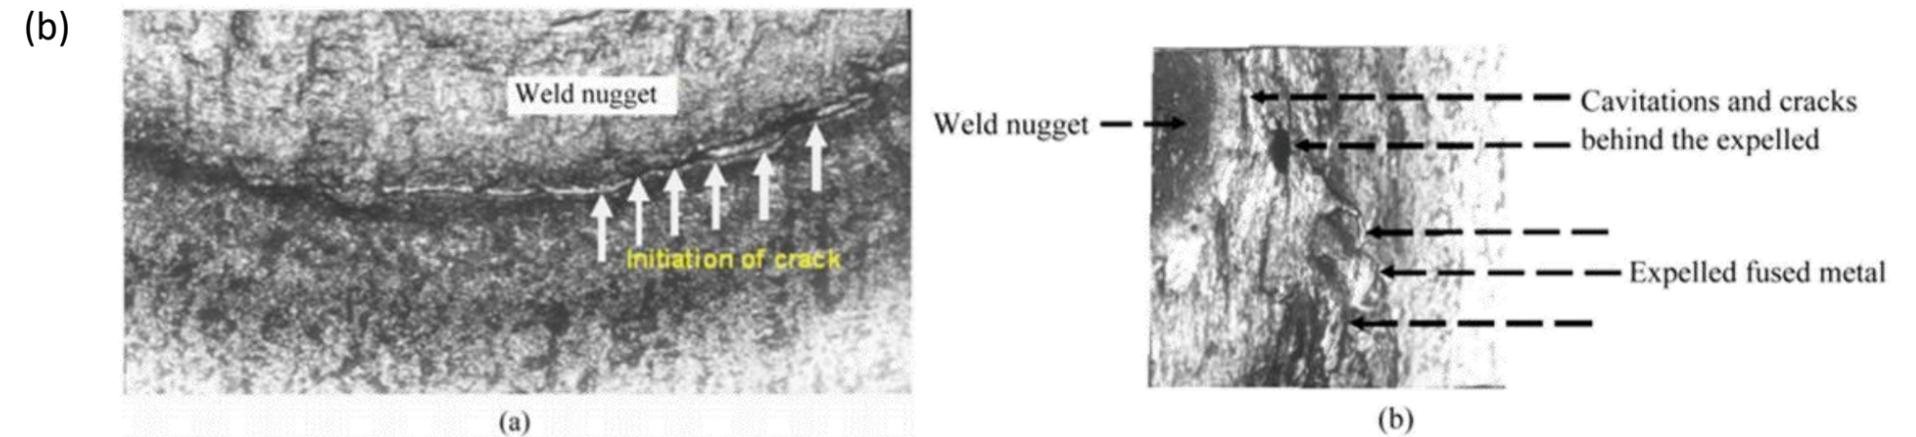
Fracture beside the weld bead; (a) crack initiation around the weld nugget; (b) the expelled weld metal.
